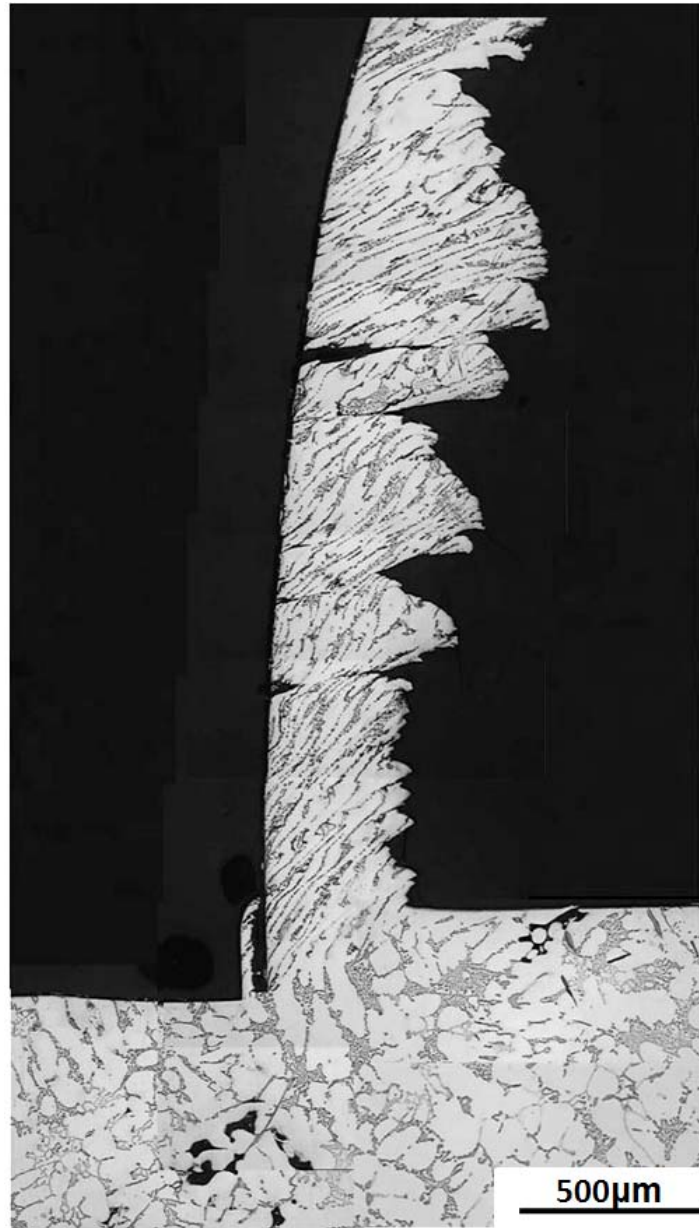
Cutting Speed 115m/min, Feed 0.25mm
